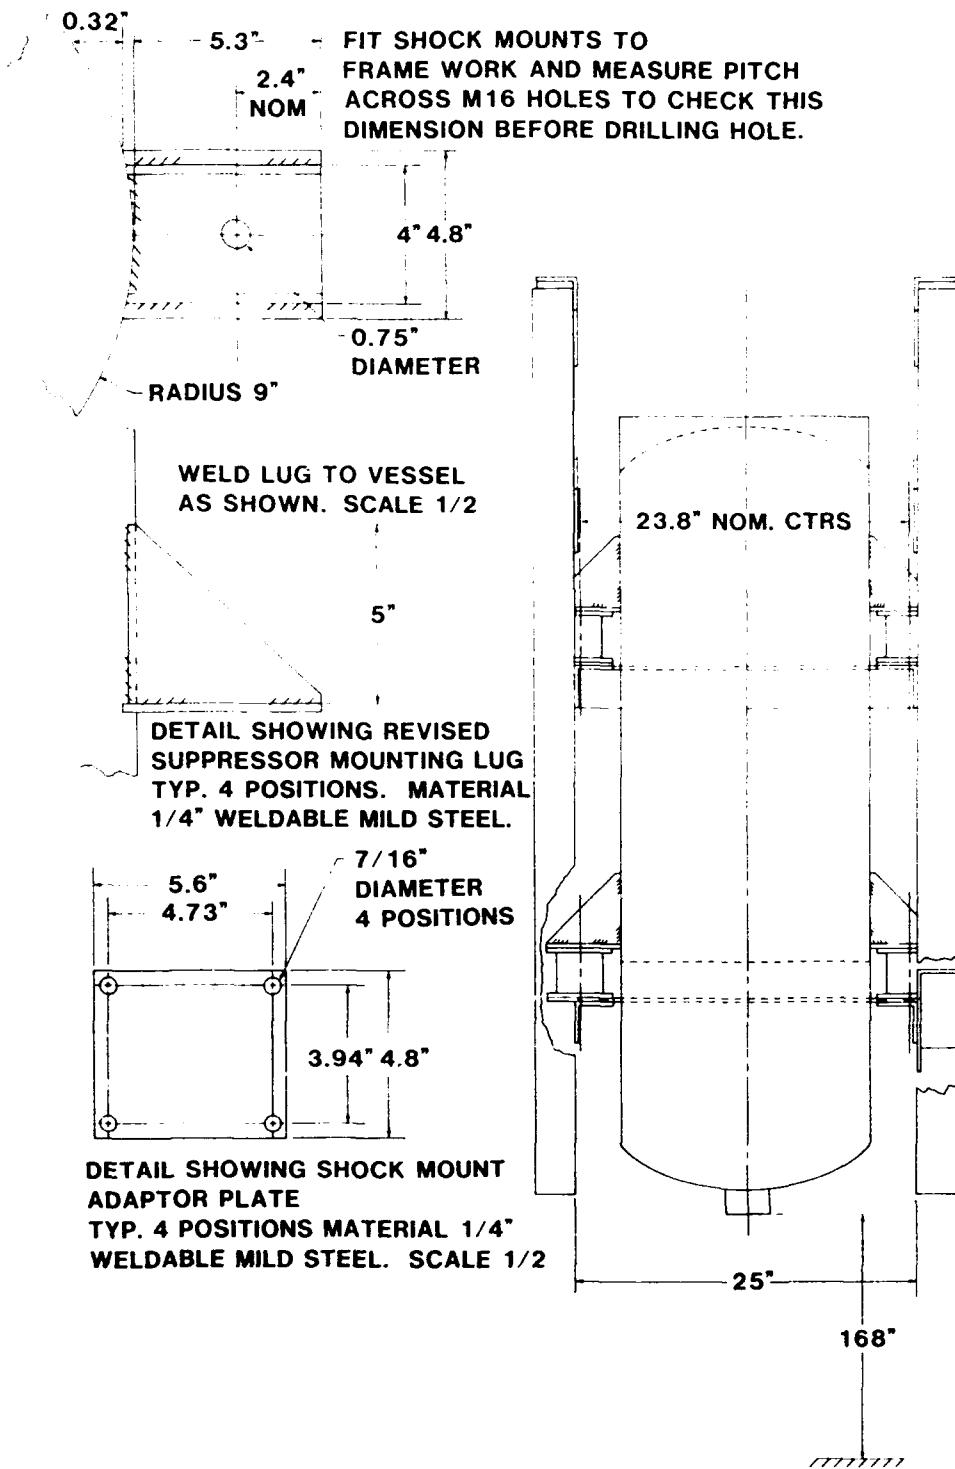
Company 'C' Cylinder Assembly with Shock Mount.
